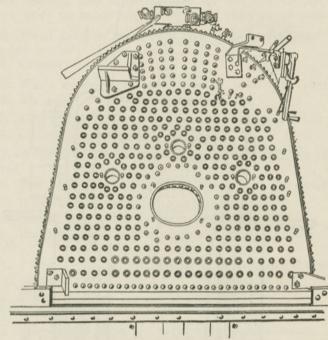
Flannery Bolts, Back Head, Santa Fé Type Boilers, B. & L. E. R. R.
